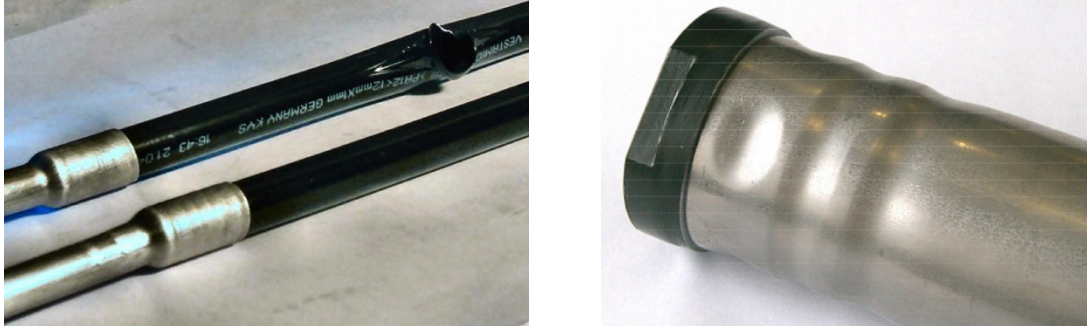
The picture in the left shows crimping of steel fittings onto rubber hoses. The picture in the right shows crimping of a steel truck wing holder [29].
